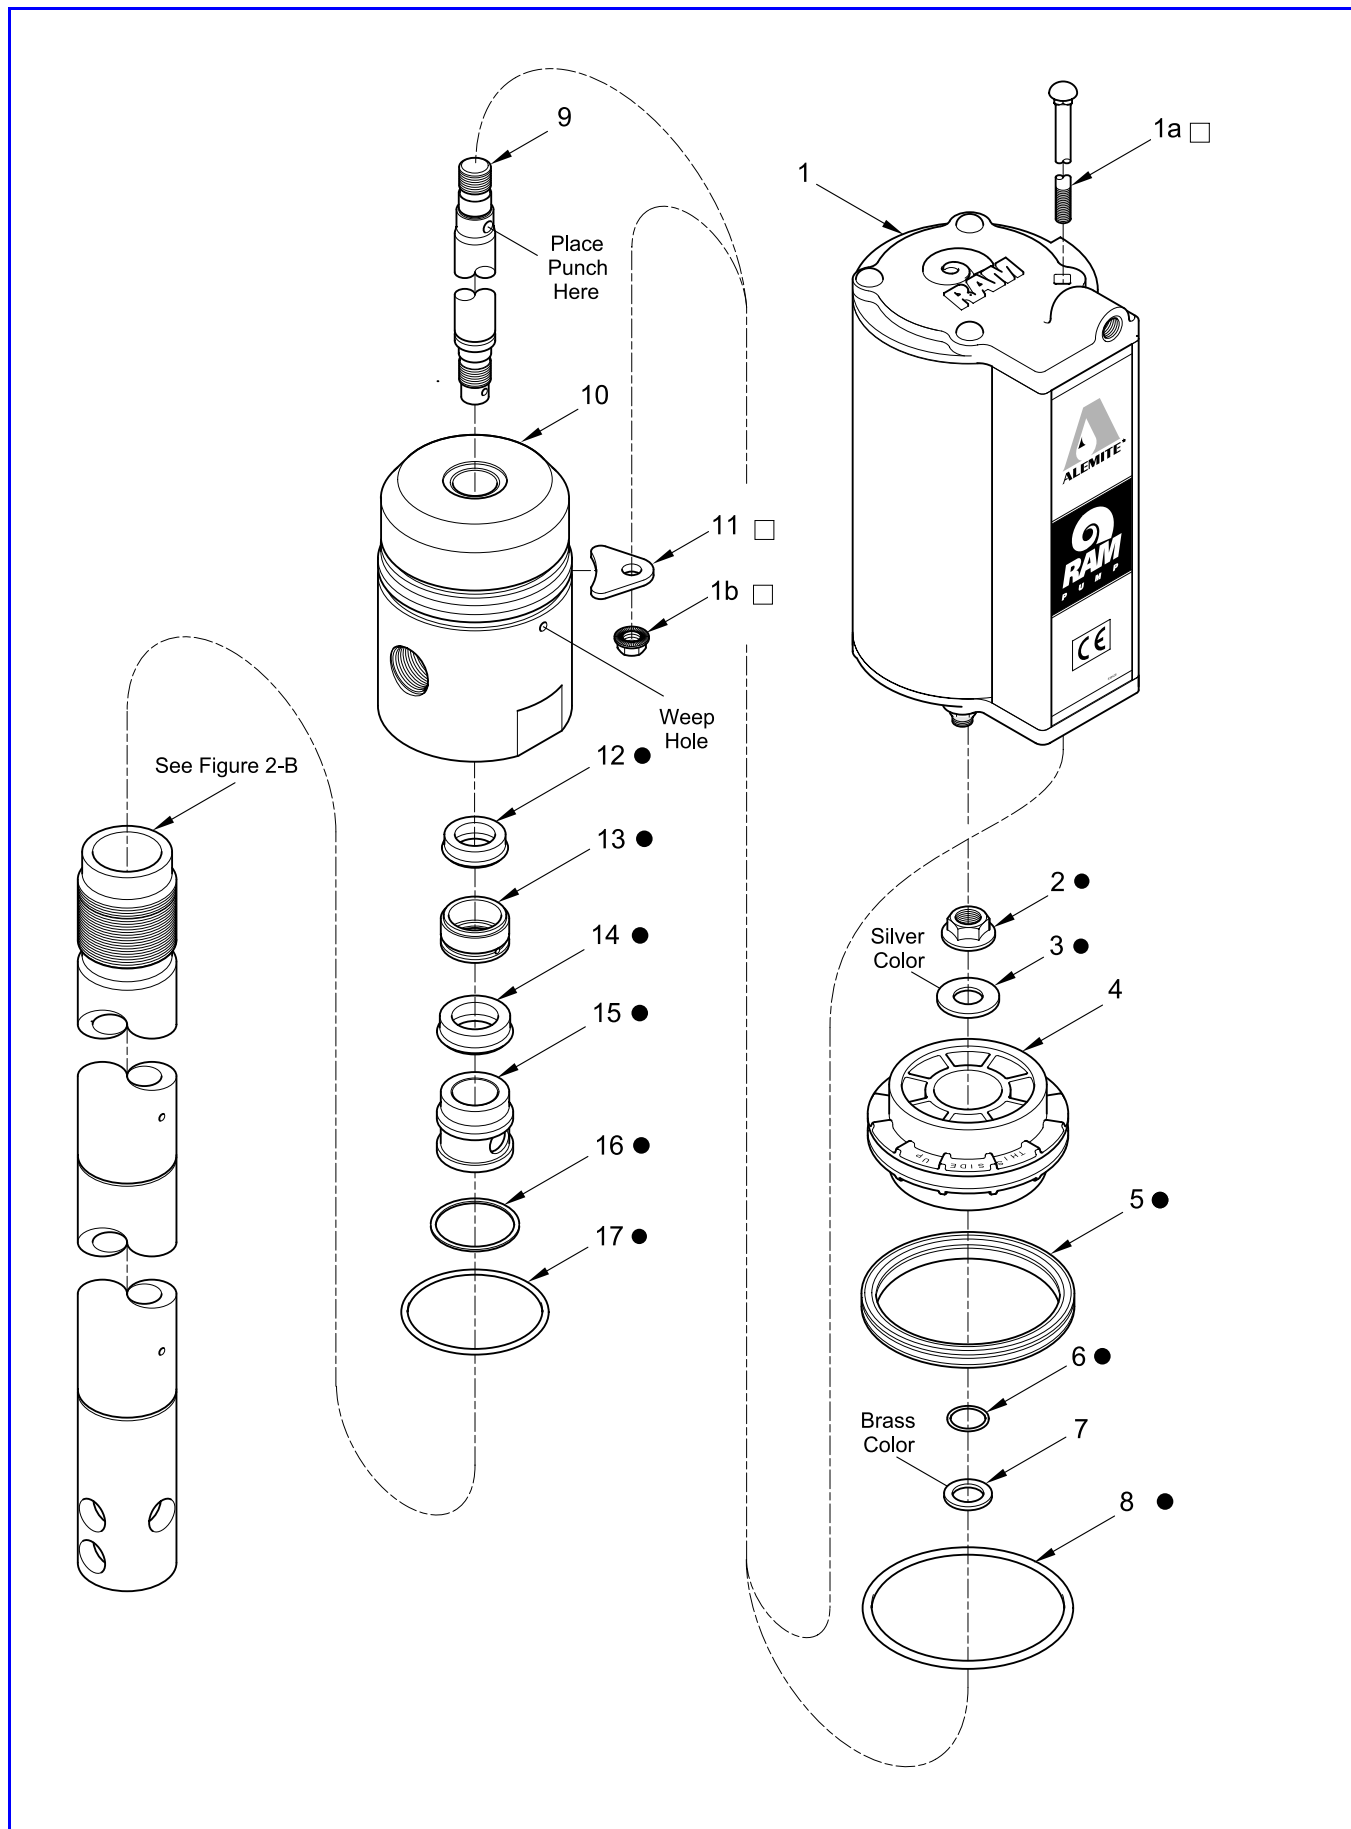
High-Pressure Stripped Pump Models 9911-1 and 9950-1 Series - Exploded View
